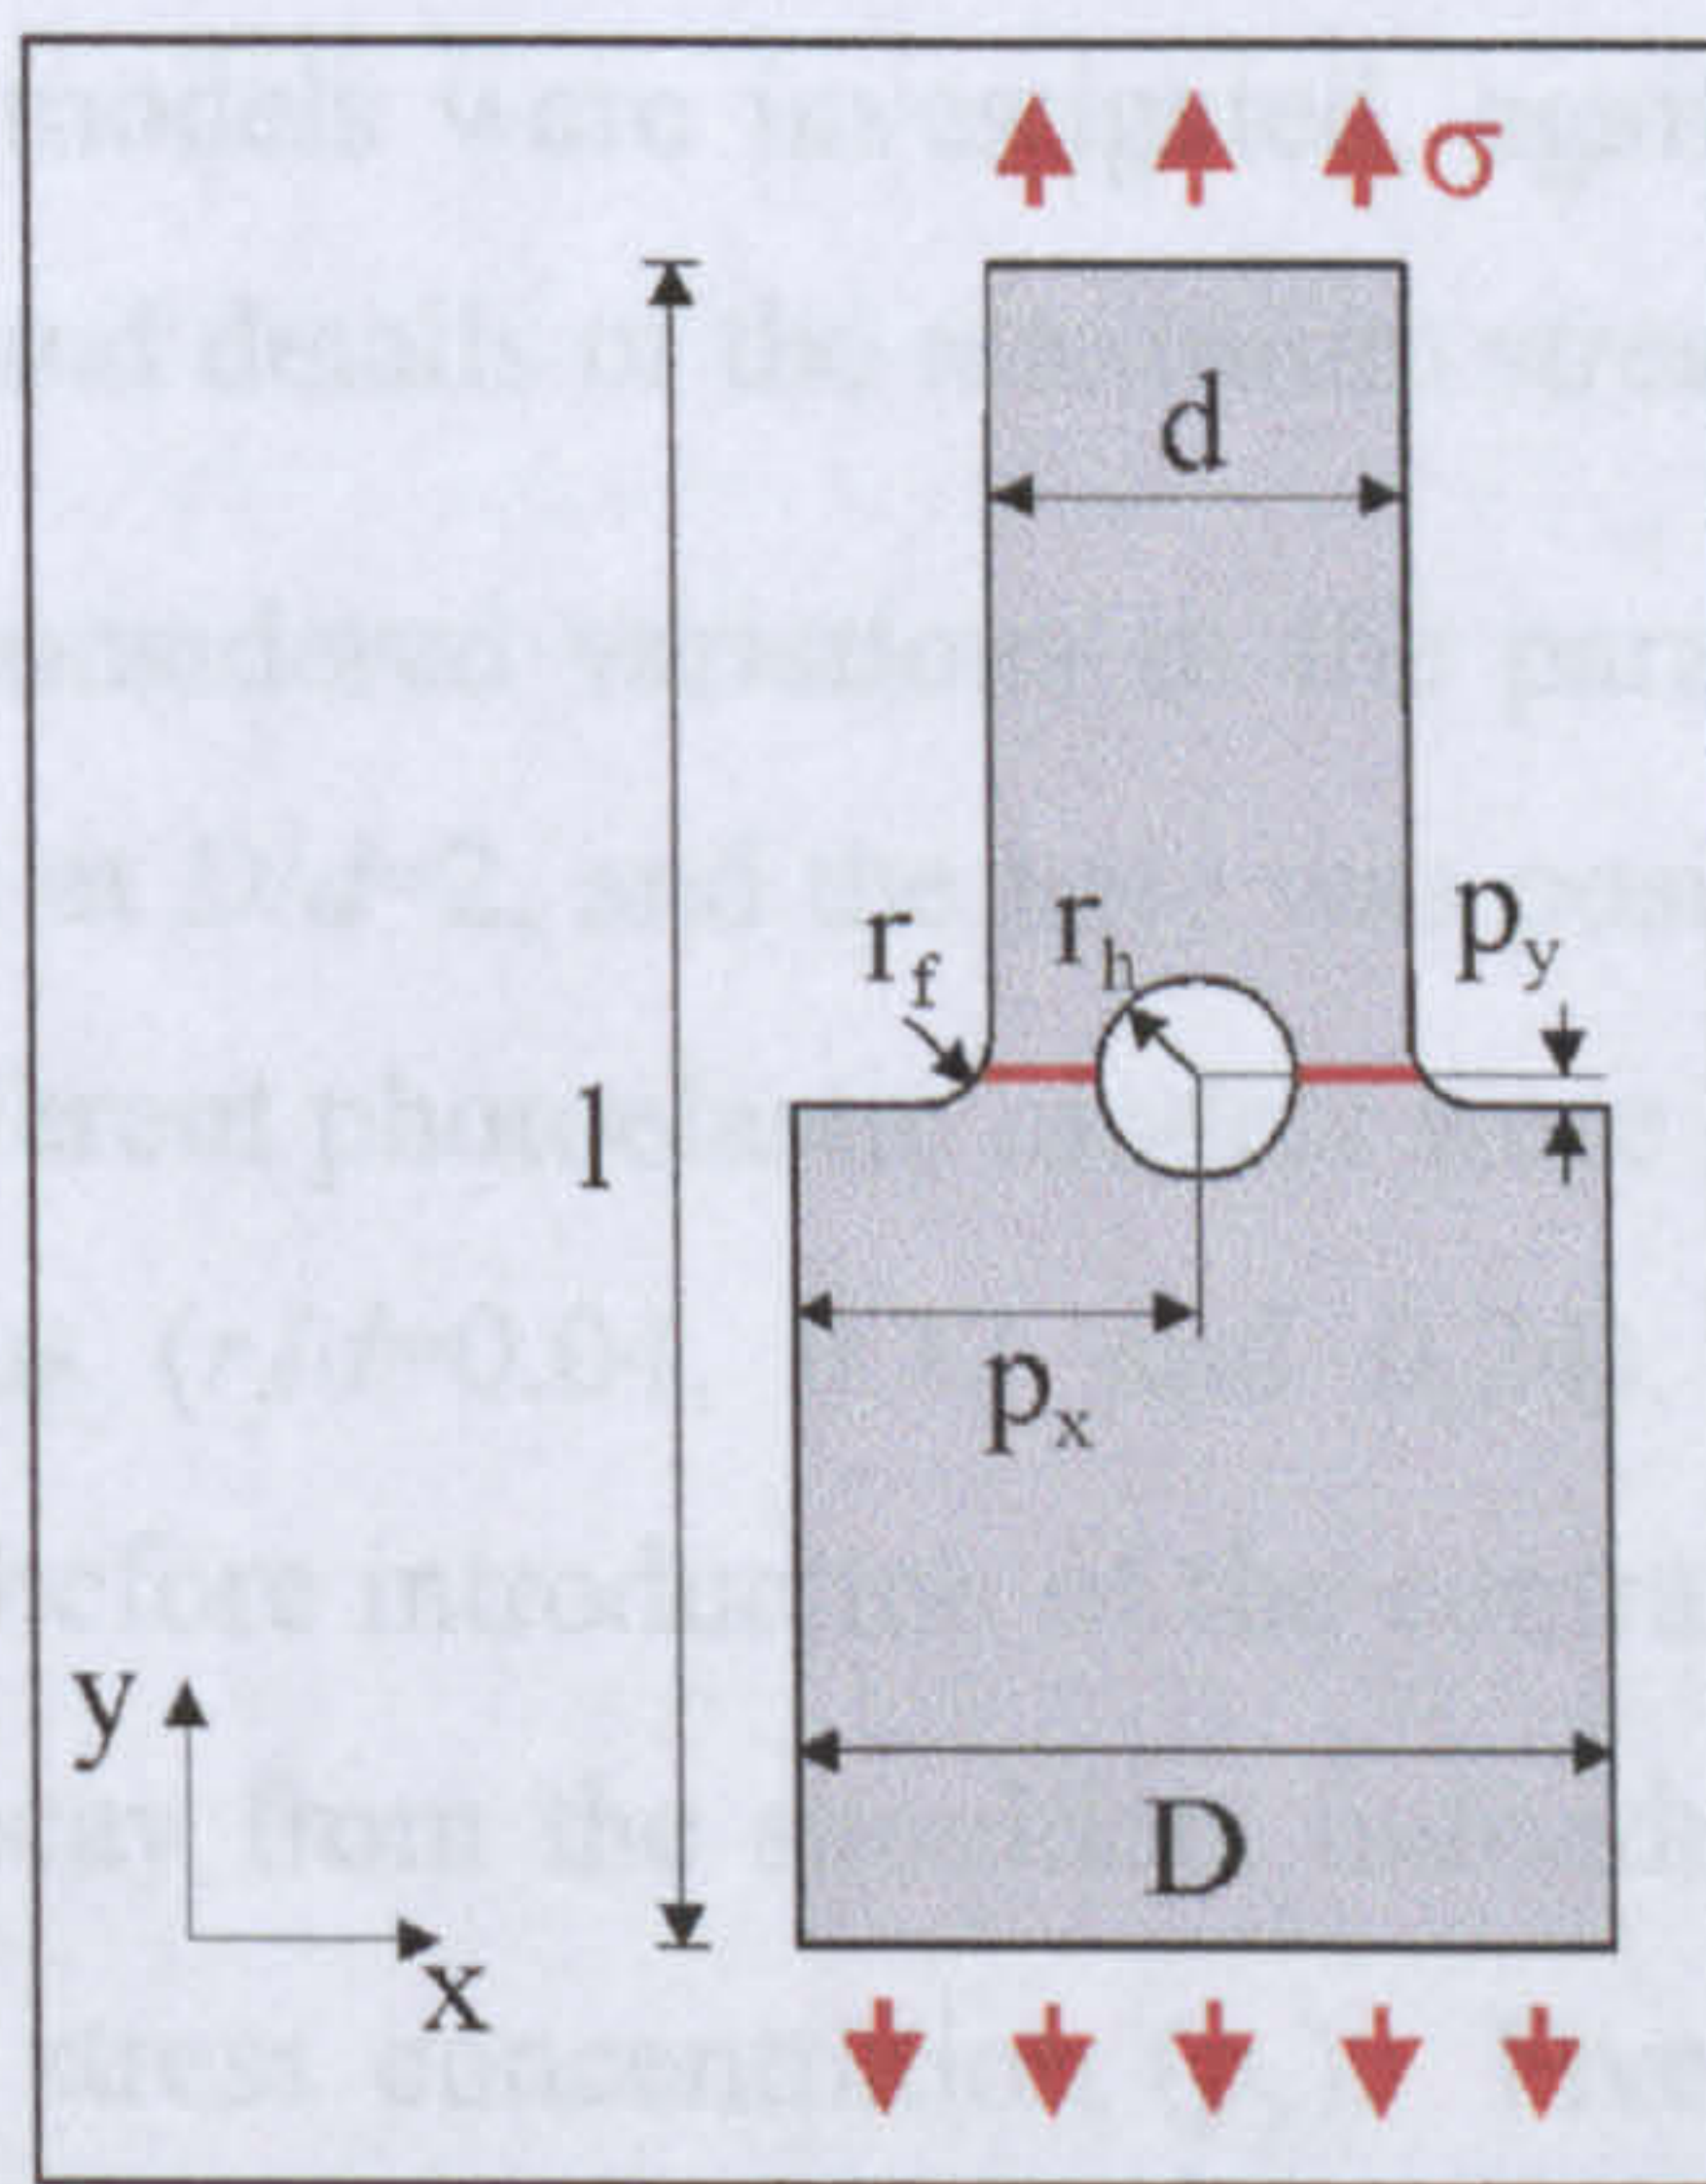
Geometric parameters involved in the problem of a hole placed between shoulder fillets
